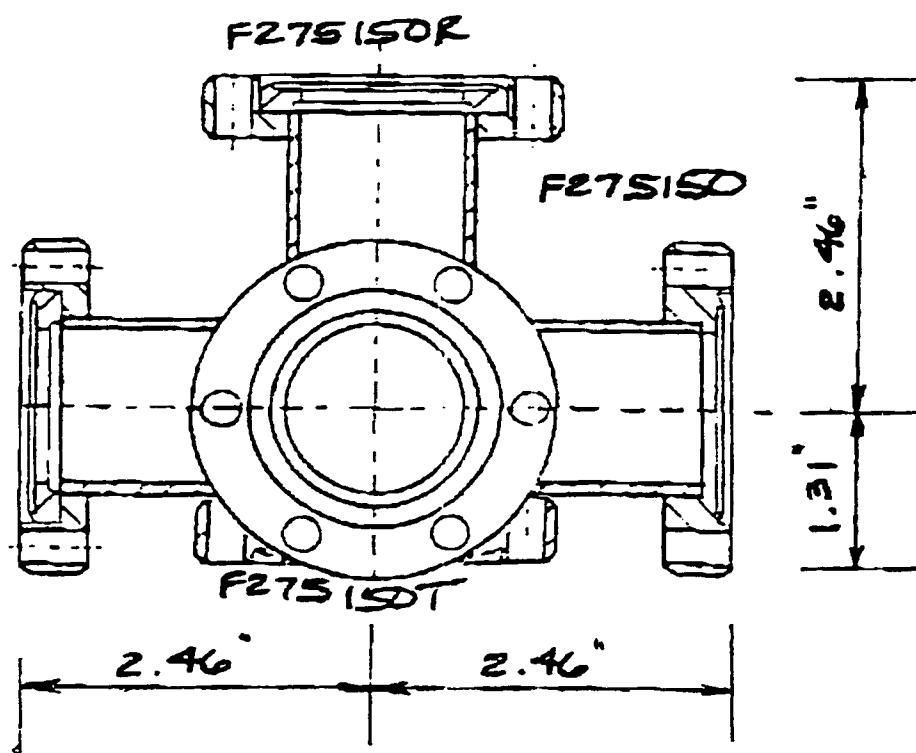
Mechanical sketch of the modified six-way cross vacuum chamber.
